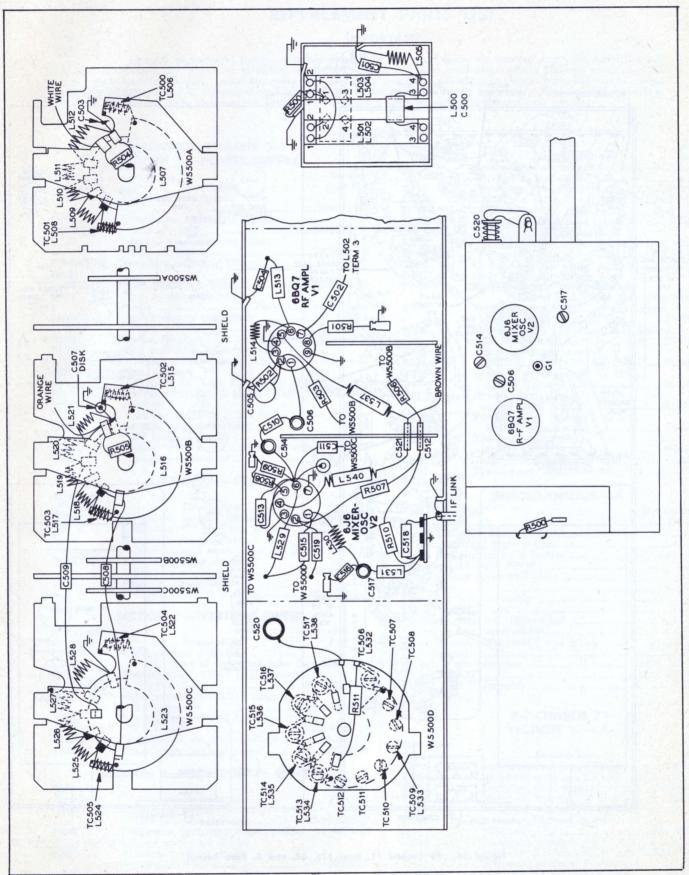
Television Tuner Part No. 76-7427, Base Layout
